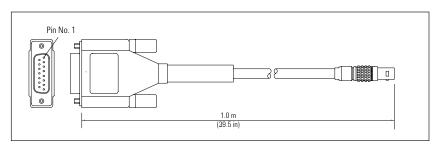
Mechanical dimension for DSUB 15-pin cable (87405C-103)
